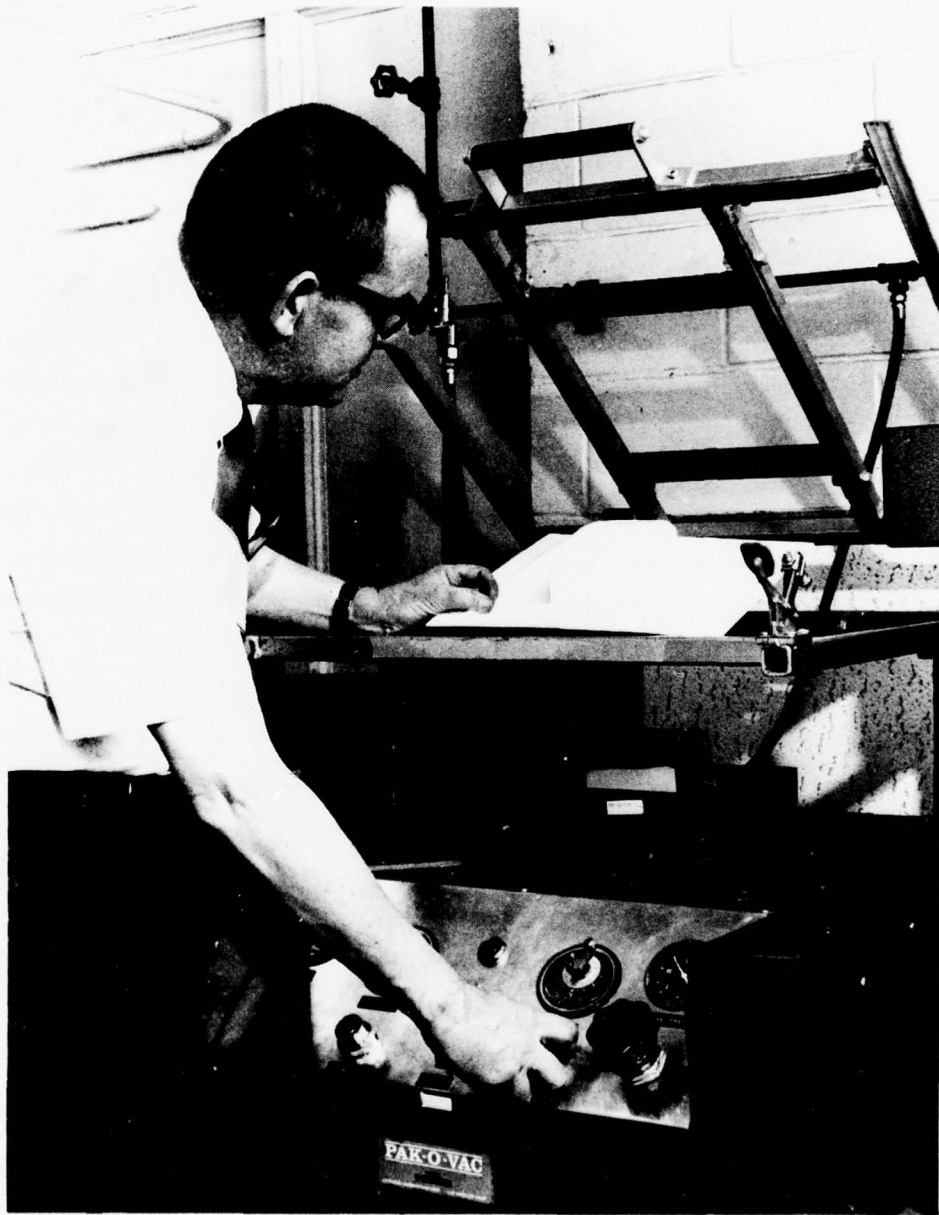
Vacuum Former and Epoxy Mold Used to Form Thin Photochromic-Coated Plastic Sheet
